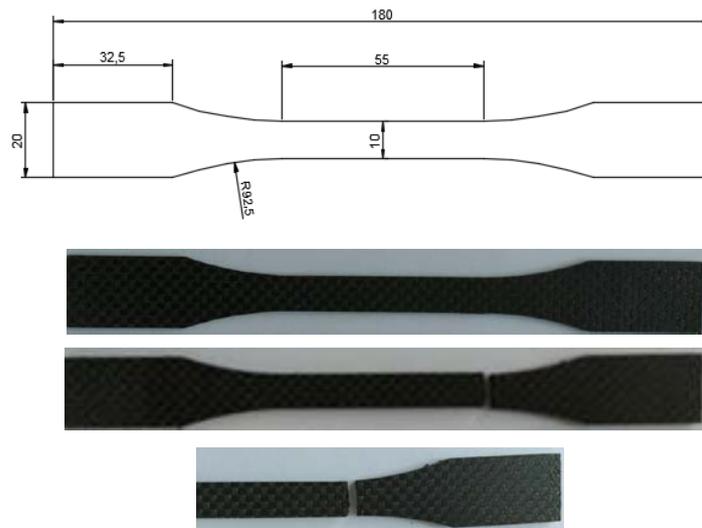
Tensile-tensile fatigue specimens and failure mode.
